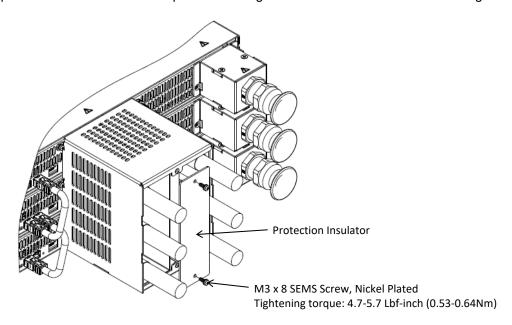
Three 20V-40V Units Protection Insulator Assembly
